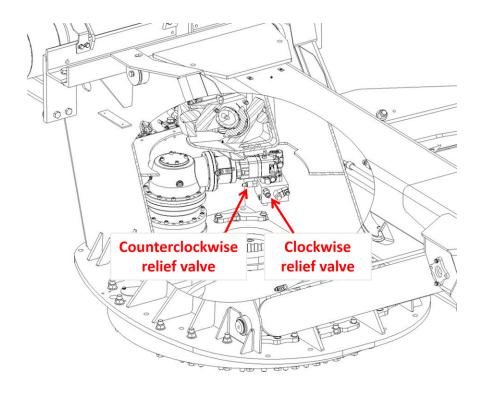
POSITION OF THE ROTATION MOTOR RELIEF VALVES
